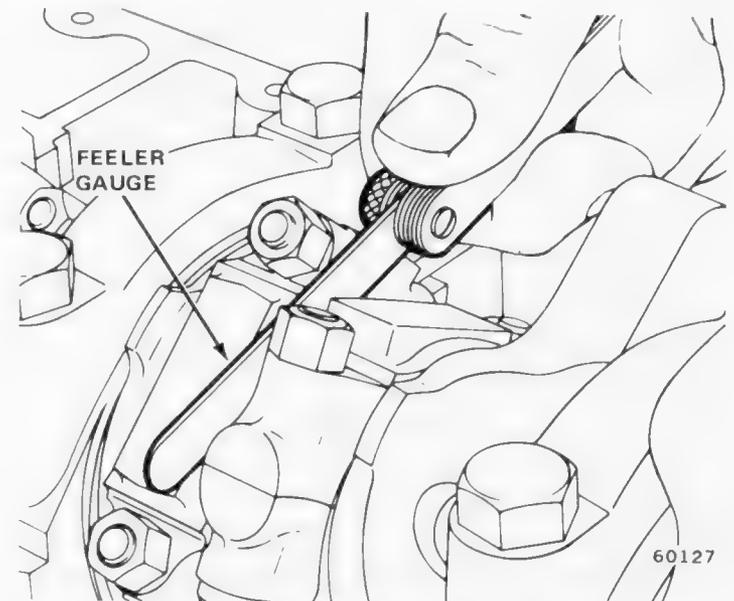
B-154 Connecting Rod Side Clearance Measurement
